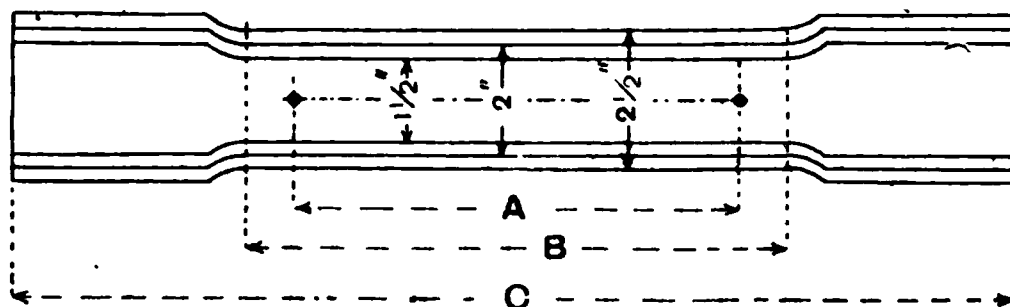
Test Piece for Plates (Standard Form): A, gauge, length 8 in.; B, parallel for not less than 9 in.; C, total length above 18 in.
